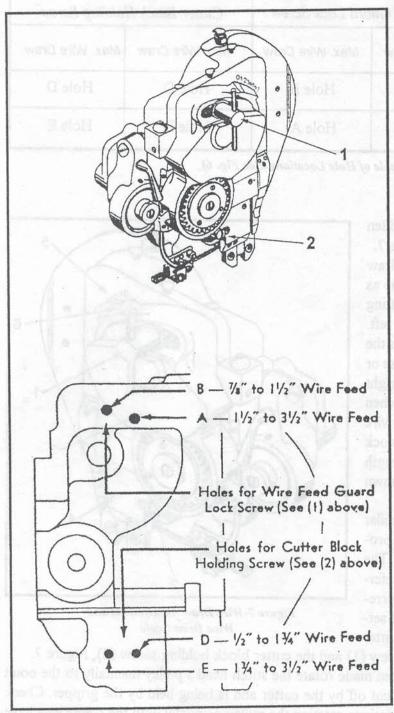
Positioning Wire Feed Lock Screw and Cutter Block Holding Screw
